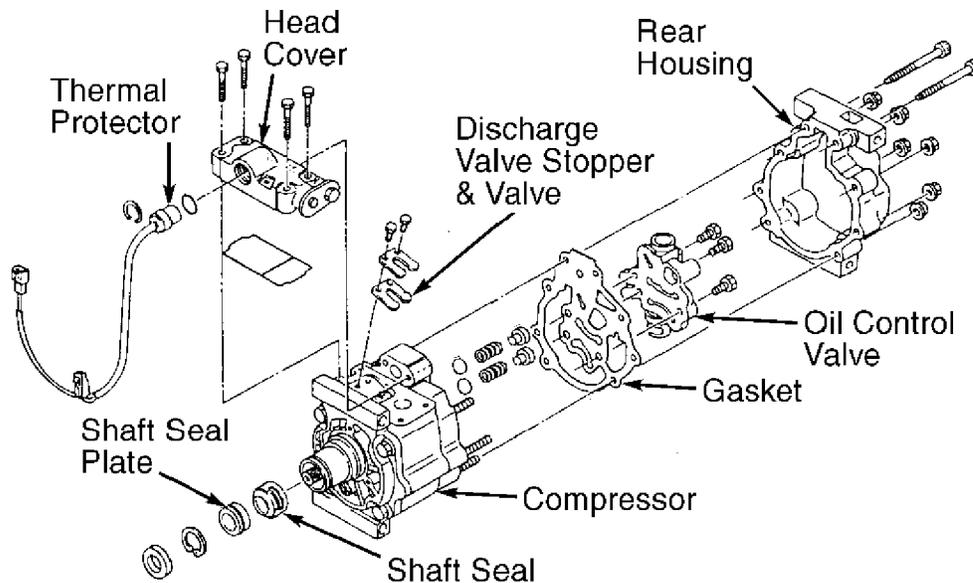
Exploded View Of Compressor (Panasonic Rotary Vane)
